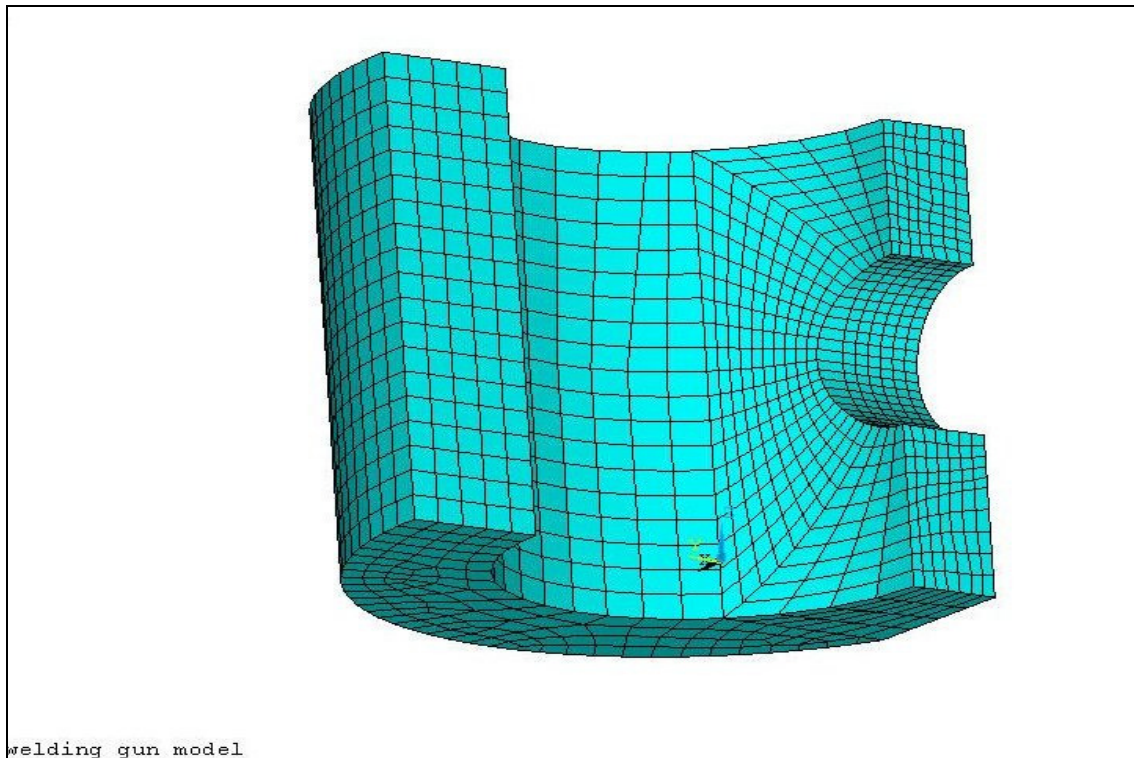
Meshing external block of the welding torch model in Ansys.
